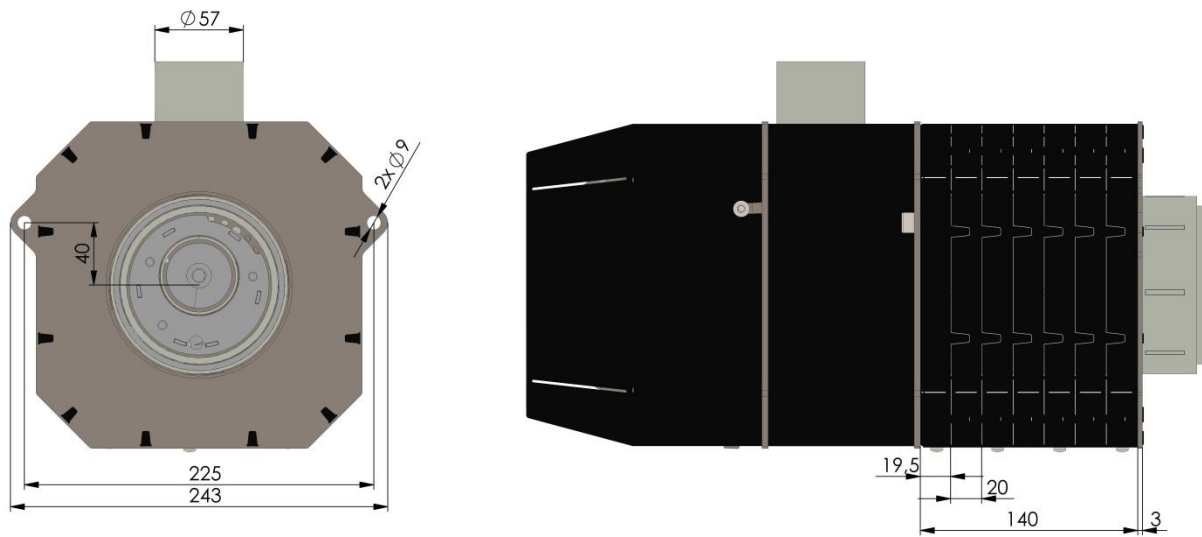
Burner view 5-20 kW with isolation jacket and mounting plate.
